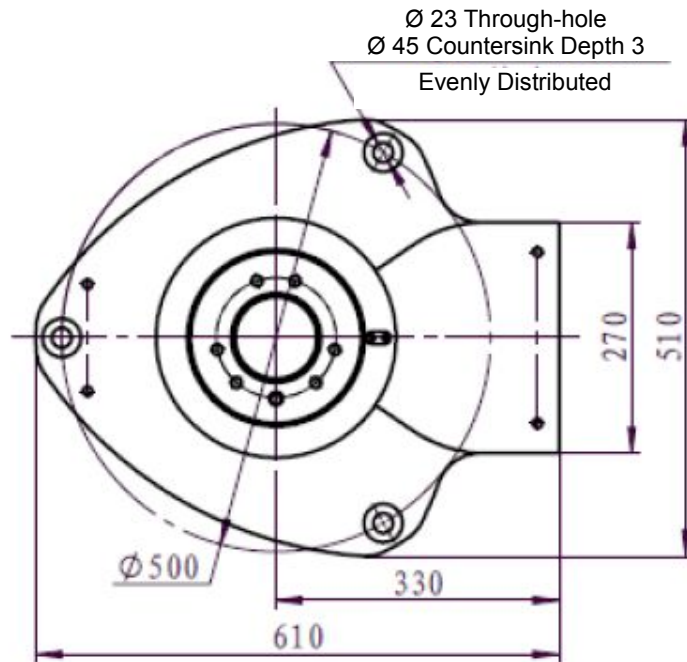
Base Mounting Hole Dimensions of SR18/SR18L8/SR25 Robot
